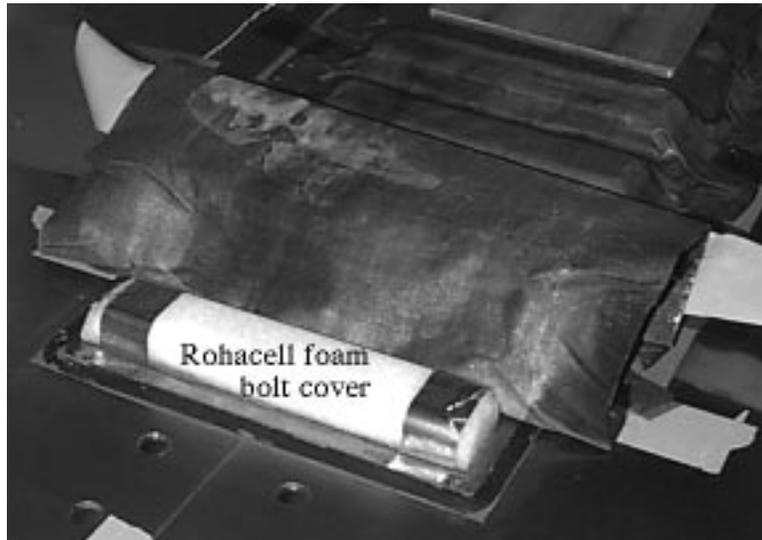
Photograph of the end Rohacell foam bolt cover over the splice plate bolts. The splice plate seal is folded back and will be bonded to the finger seal over the end bolt cover.
